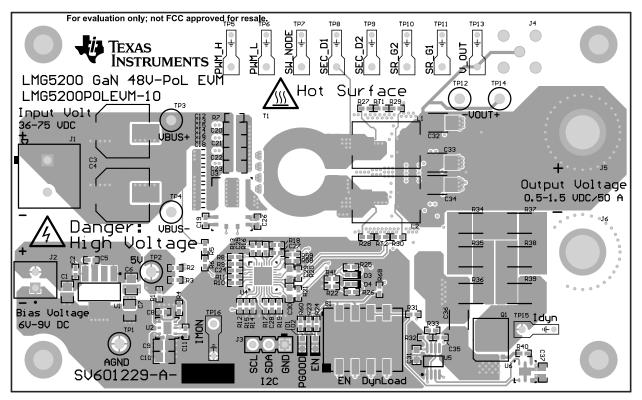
LMG5200POLEVM-10 Top Layer and Components
